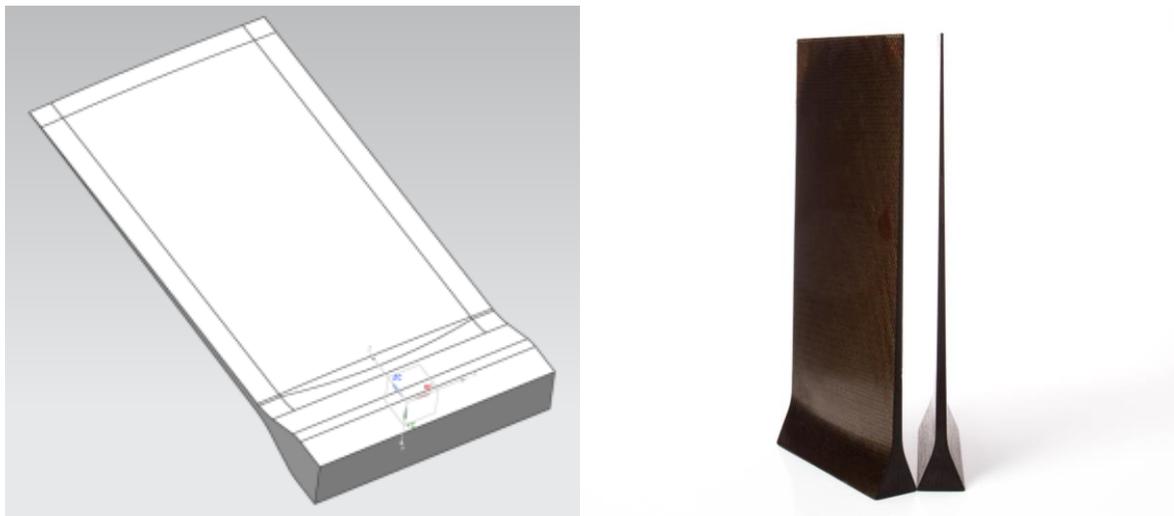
Illustration showing CAD-drawing of the demonstrator and photograph of two manufactured high temperature carbon fibre demonstrator components.
